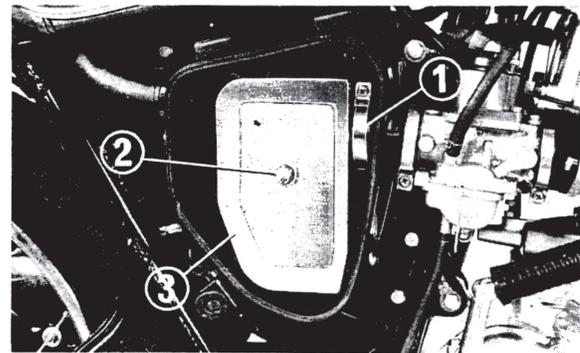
(1) Tube clamp (2) Element fixing bolt (3) Air cleaner element
